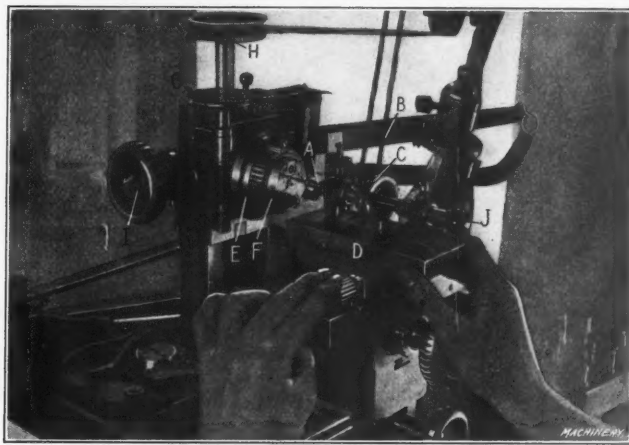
Damaskeening Machine of the Upright Type for Decorating Bridges, Plates, etc.
